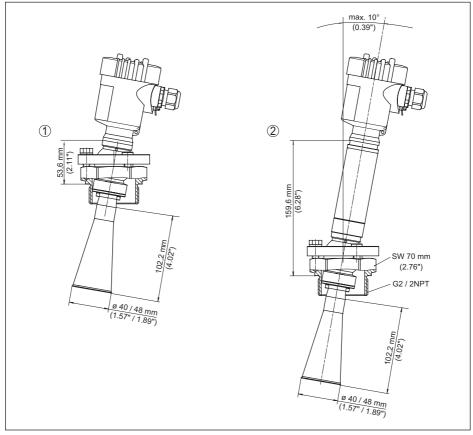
VEGAPULS 68, horn antenna and swivelling holder, threaded fitting
